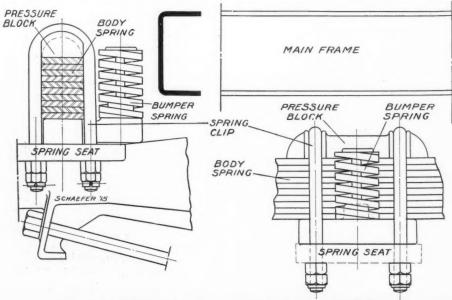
Method of Mounting Spring on the Garford Trucks Springs are mounted outside of the frame and bumper springs are of square section
